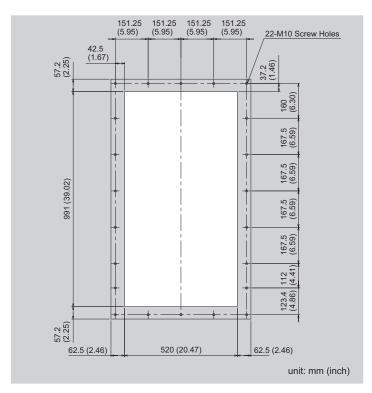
Panel Cut-Out Dimensions (CIMR-A□4T0414U)
